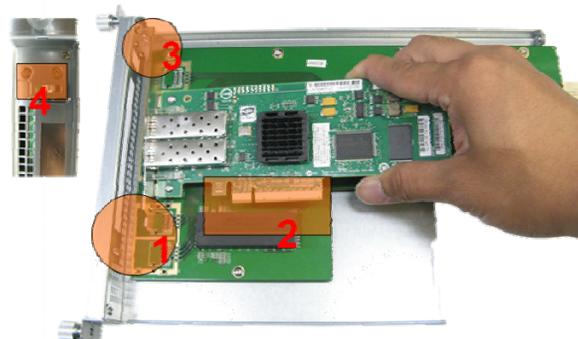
Installing an Adapter to 3U16 Auxiliary Module
